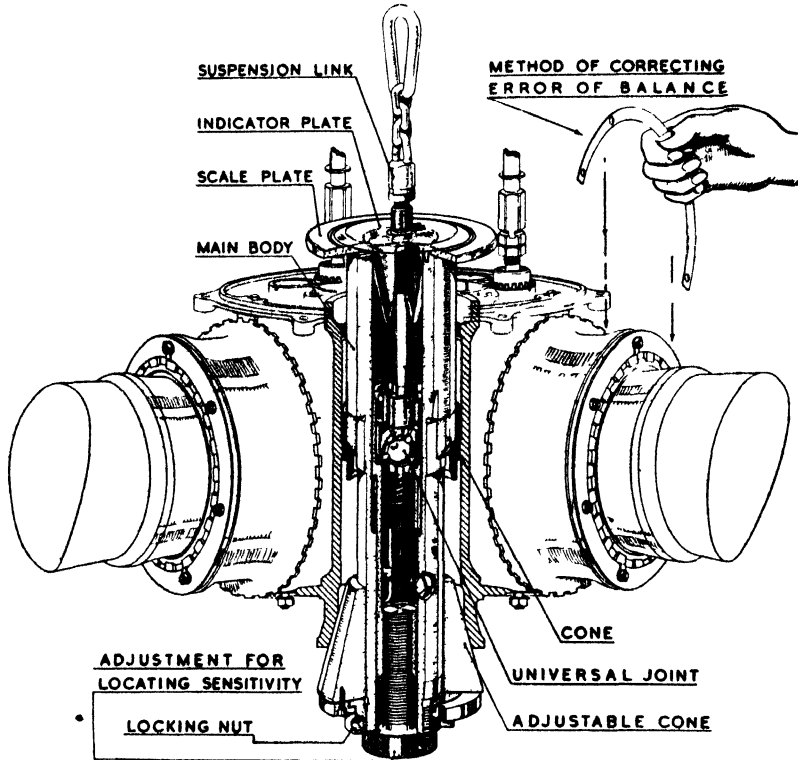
THE ROTOL PROPELLER BALANCING METHOD
